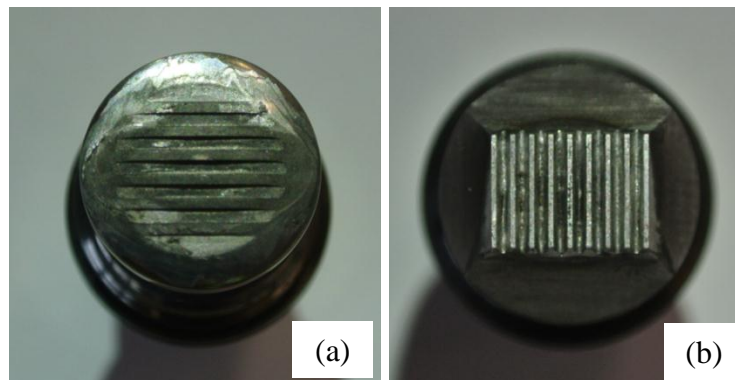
The round welding tip (a) and the rectangular welding tip (b).
